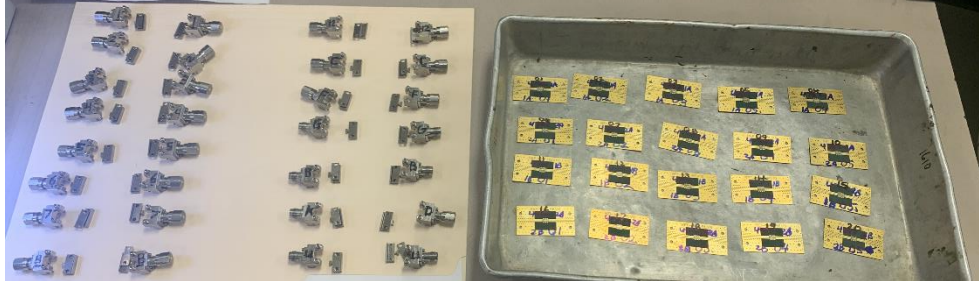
Group A inspection lot (20-piece sample lot to be exposed to thermal and burn-in test): test connectors (left), test boards with the DUTs installed (right)
